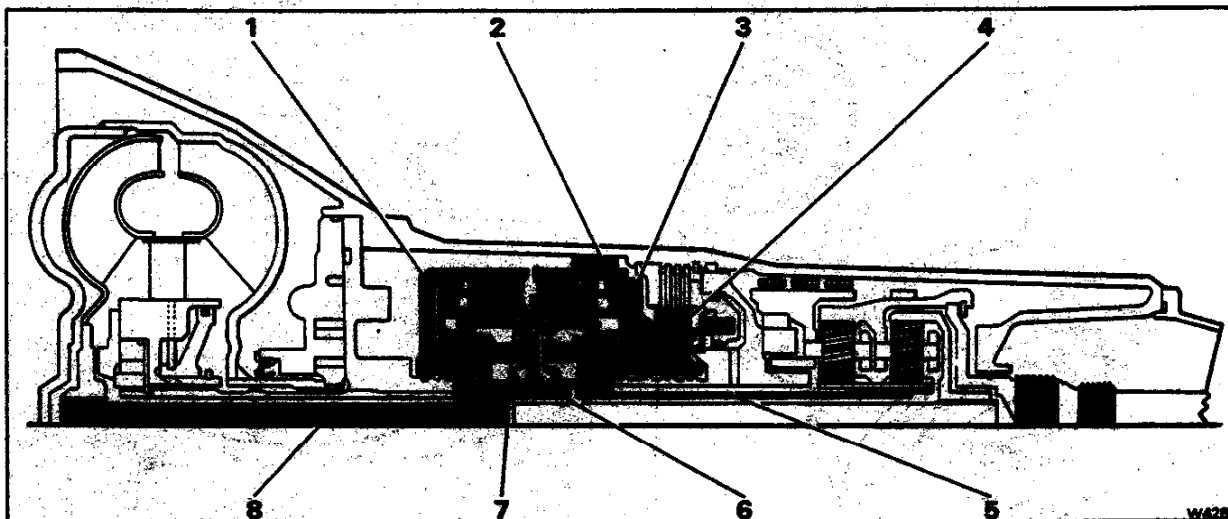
Sectioned view of transmission showing forward and direct clutches
